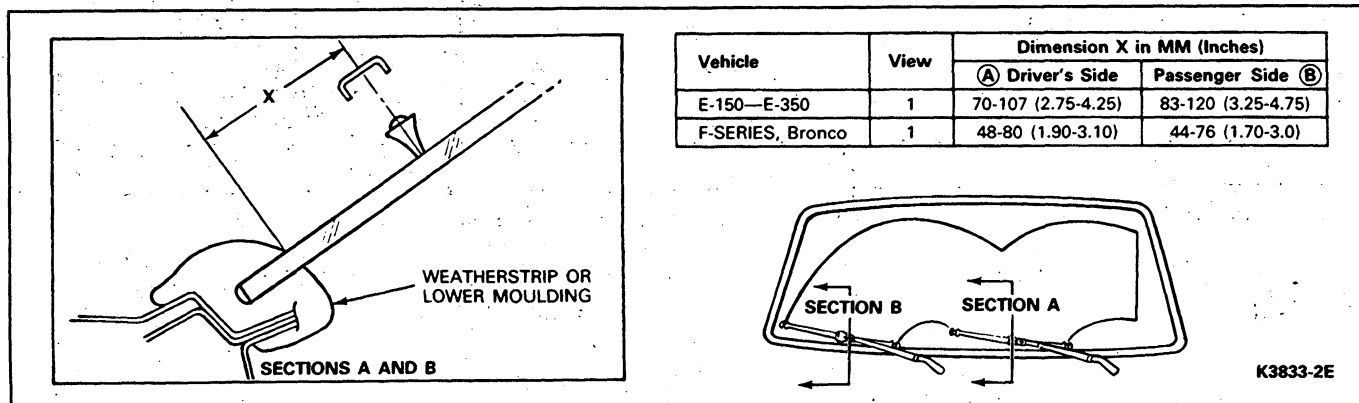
Wiper Arm and Blade Adjustment to Dimension "X"
